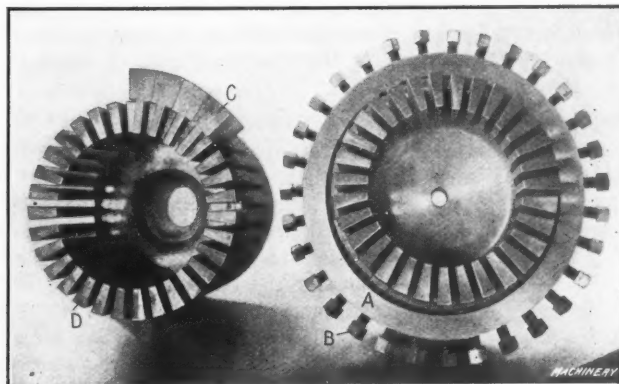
Special Chucks for holding Die and Punch Sections while Grinding
